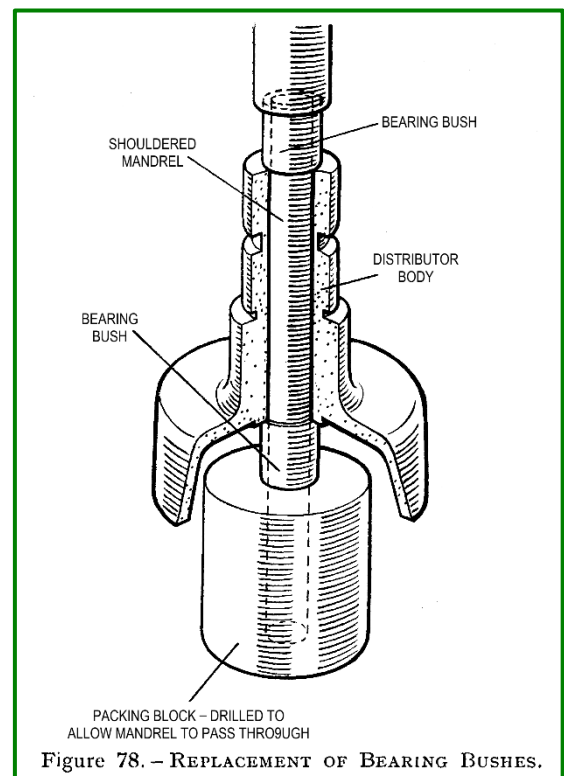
REPLACEMENT OF BEARING BUSHES.
